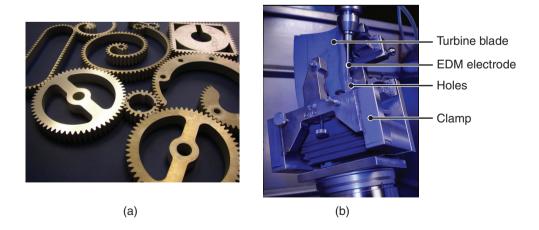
Examples of parts made by advanced machining processes. (a) Samples of parts produced by water-jet cutting. (b) Turbine blade, produced by plunge electrical-discharge machining, in a fixture to produce forced air cooling channels also by electrical-discharge machining. *Source:* (a) Courtesy of OMAX Corporation; (b) Courtesy of HI-TEK Mfg., Inc.
